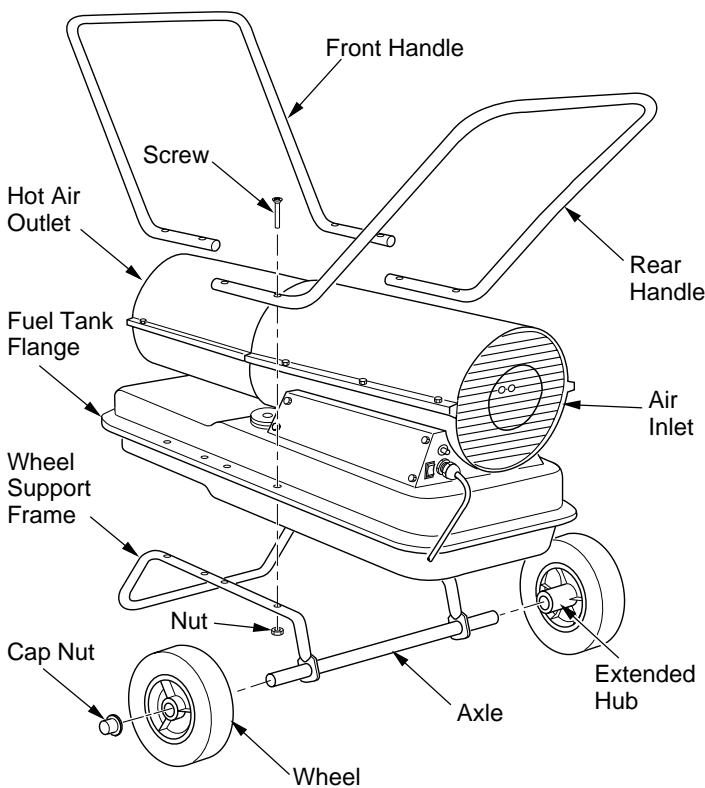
Wheel and Handle Assembly, 100/150,000 Btu/Hr Models Only
